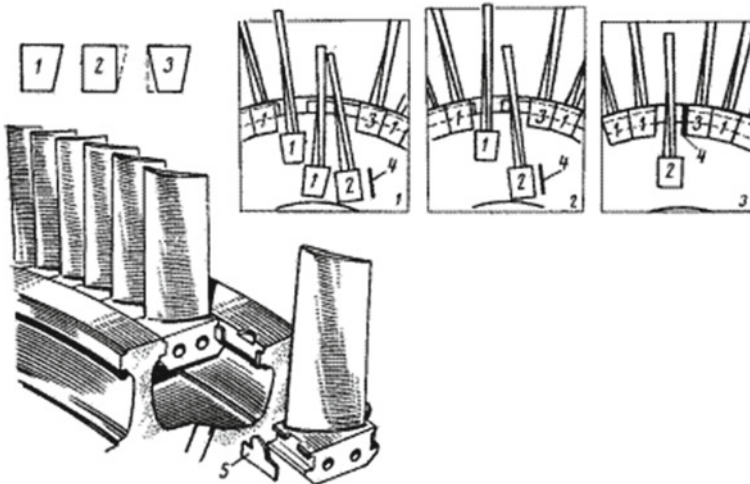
Circumferential mounting of compressor blades. 1—standard blade; 2—locking blade; 3—fitting blade; 4—gasket; 5—plate
